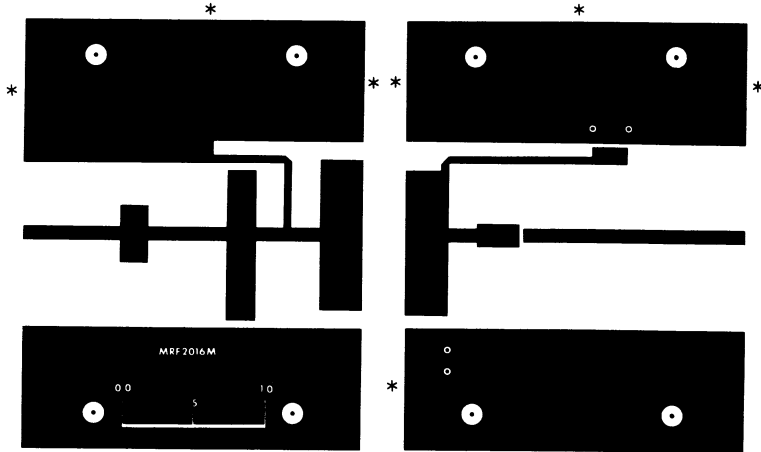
PRINTED CIRCUIT BOARD LAYOUT — 2 GHz TEST CIRCUIT
